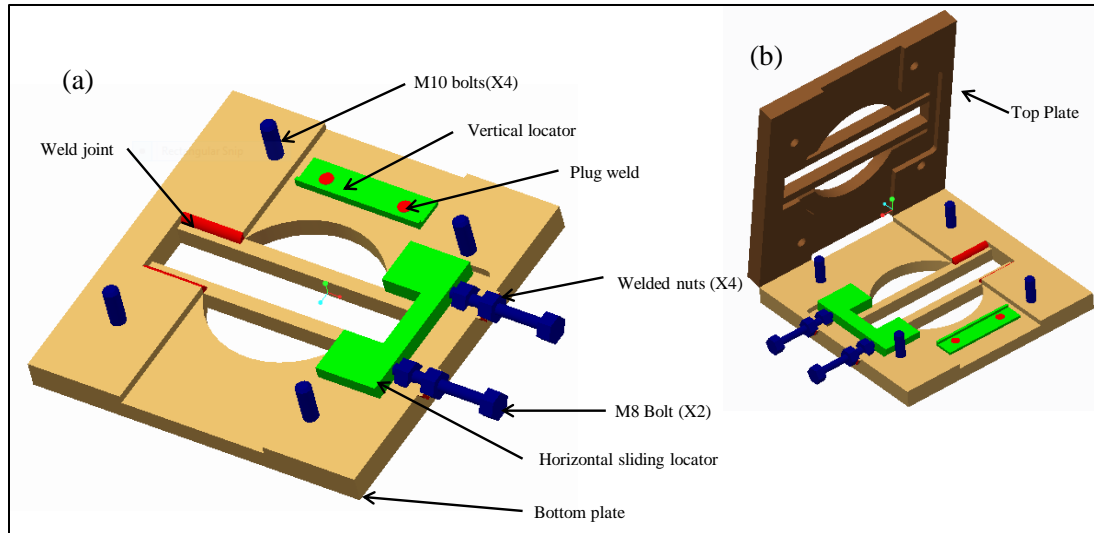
Bottom plate assembly (All dimensions in mm)
